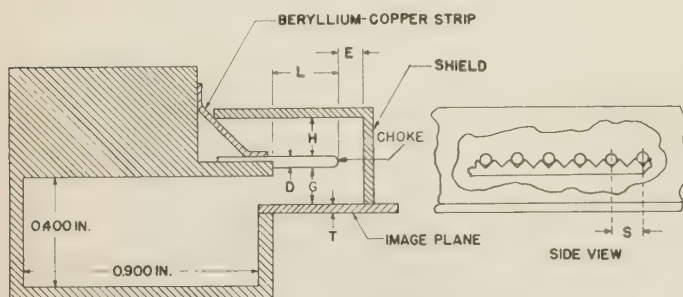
Fixture used to test longitudinal serrated chokes, cross sectional view.
